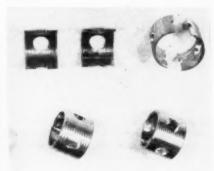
Milling bronze babbitts on a horizontal machine using slitting saws. Production is 500 pieces per hour,
